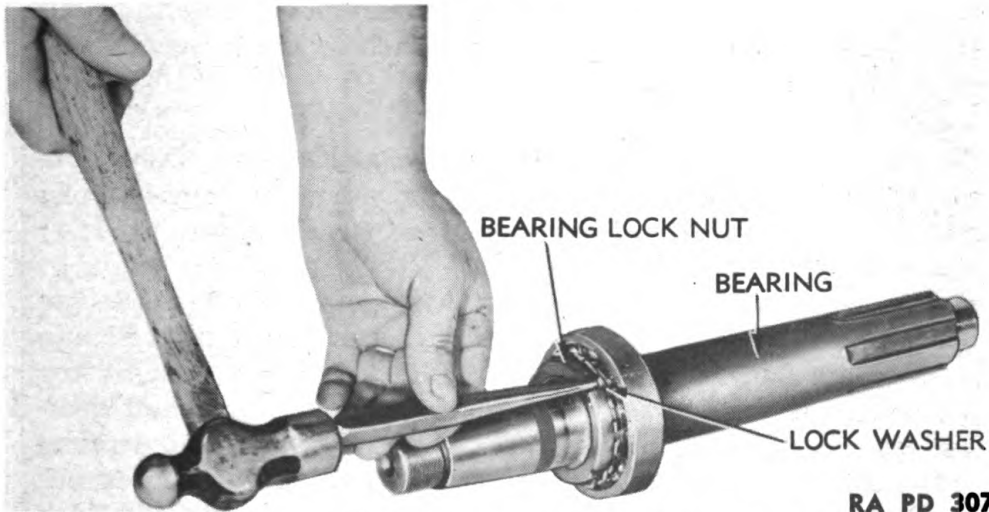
Straightening Prong of Bearing Nut Lock Washer
